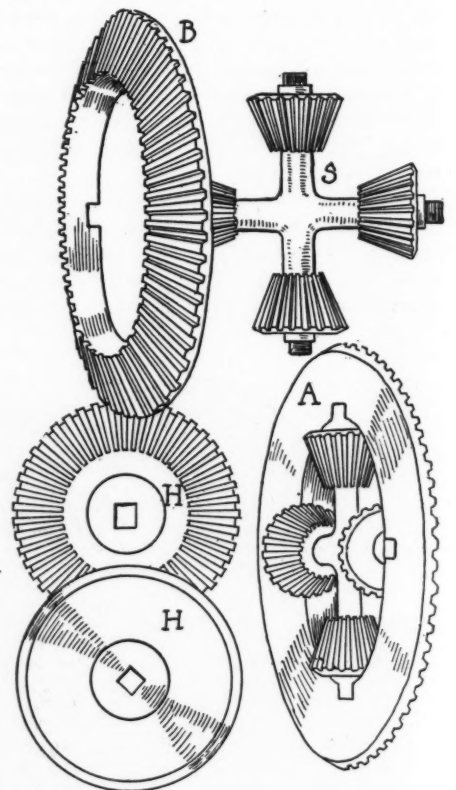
Separated parts of the ordinary differential gear. A is the spider, B the large bevel gear, F the four pinions, H the two driven bevel gears meshing with the four pinions
